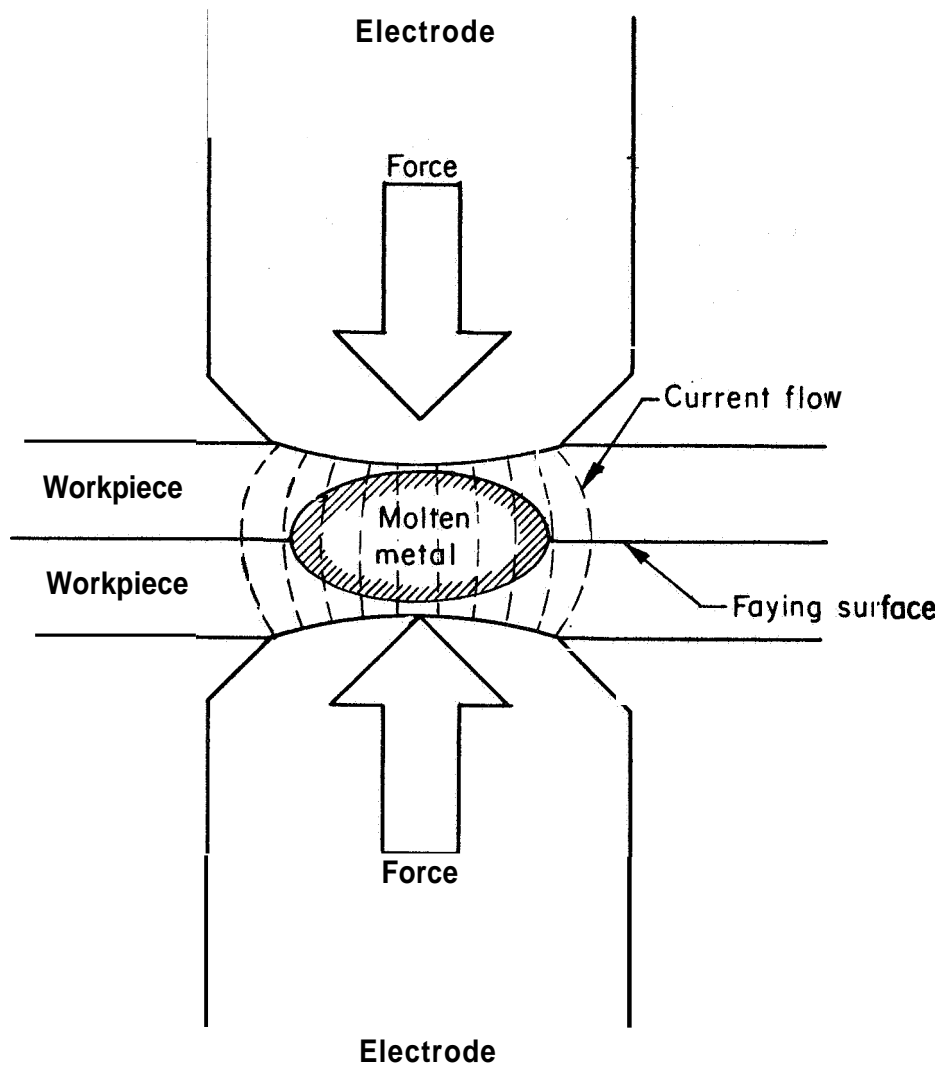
SKETCH SHOWING ELECTRICAL FLOW AND HEAT GENERATION IN A SPOT WELD
